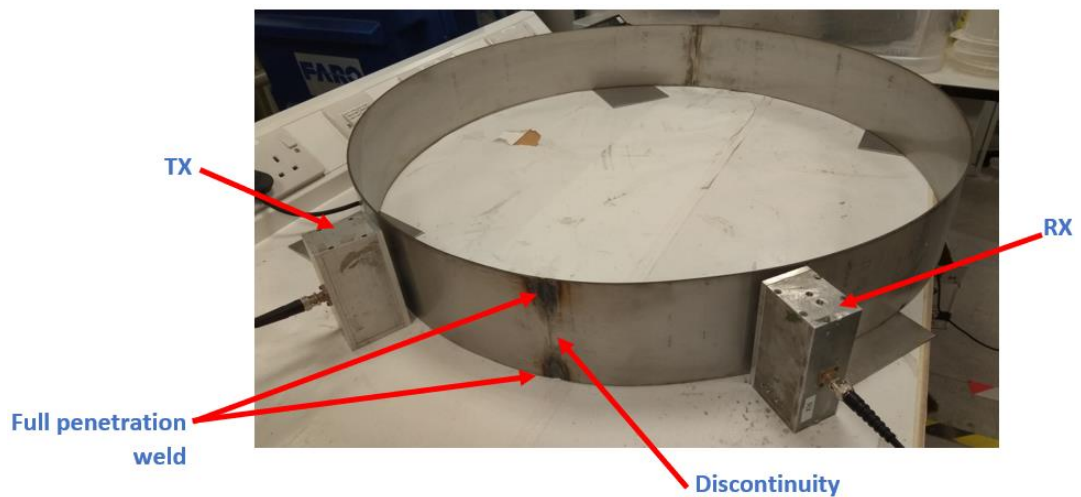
Defected 800m diameter 316L stainless-steel sample being inspected using a pair of air-coupled ultrasonic transducers.
